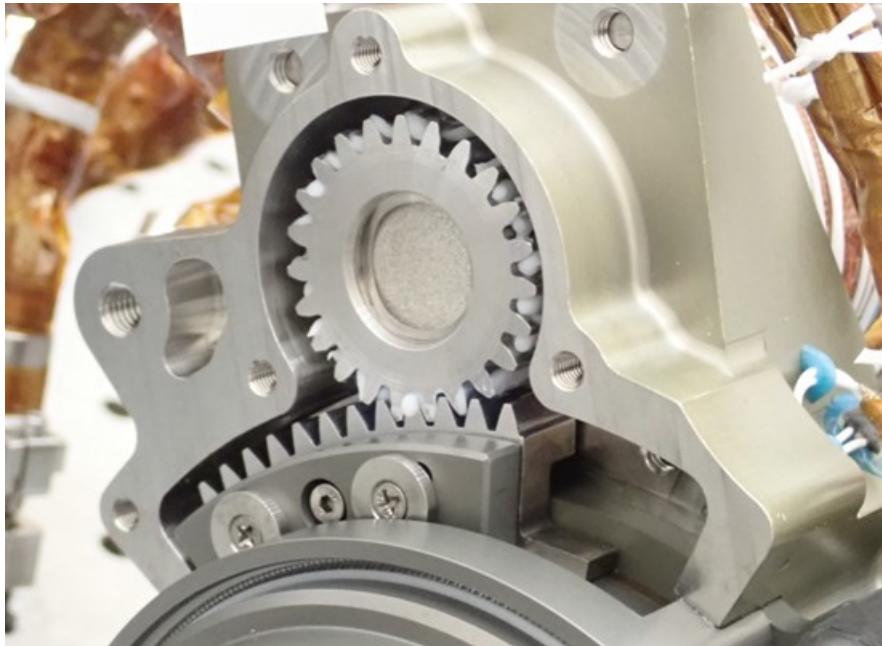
Detail view of mesh between chuck actuator output pinion and segmented gear. Note the hardstop surfaces on either side of the segmented gear which serve to limit angular motion of the cam relative to the rest of the corer. A housing cover part (not shown) is installed over the volume occupied by this gear mesh.
